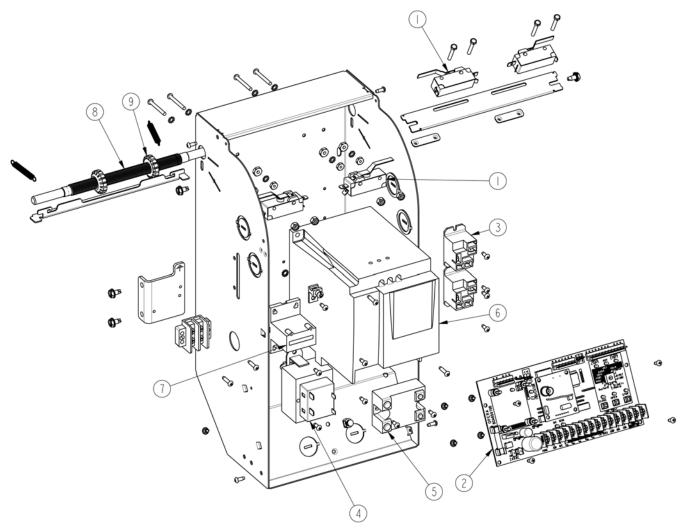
Rapido™ RSH 120V Control Box with BOARD 070M
